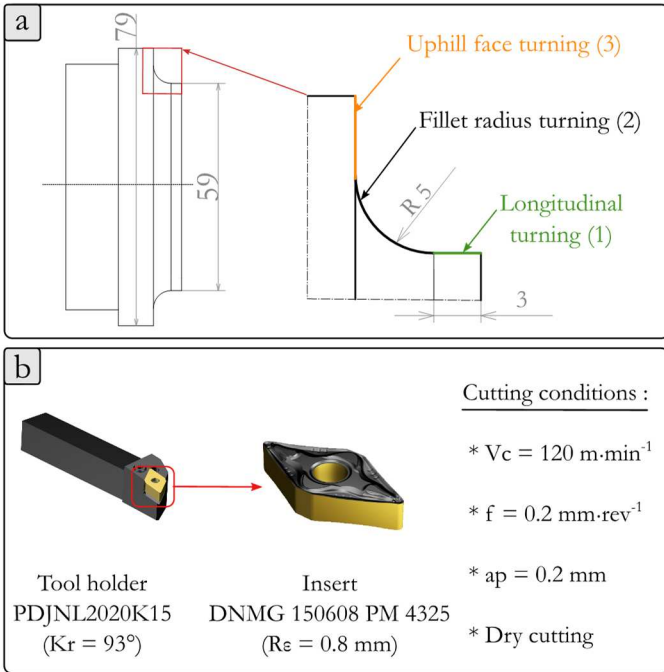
The case-study a) workpiece geometry, b) cutting tool and conditions.
